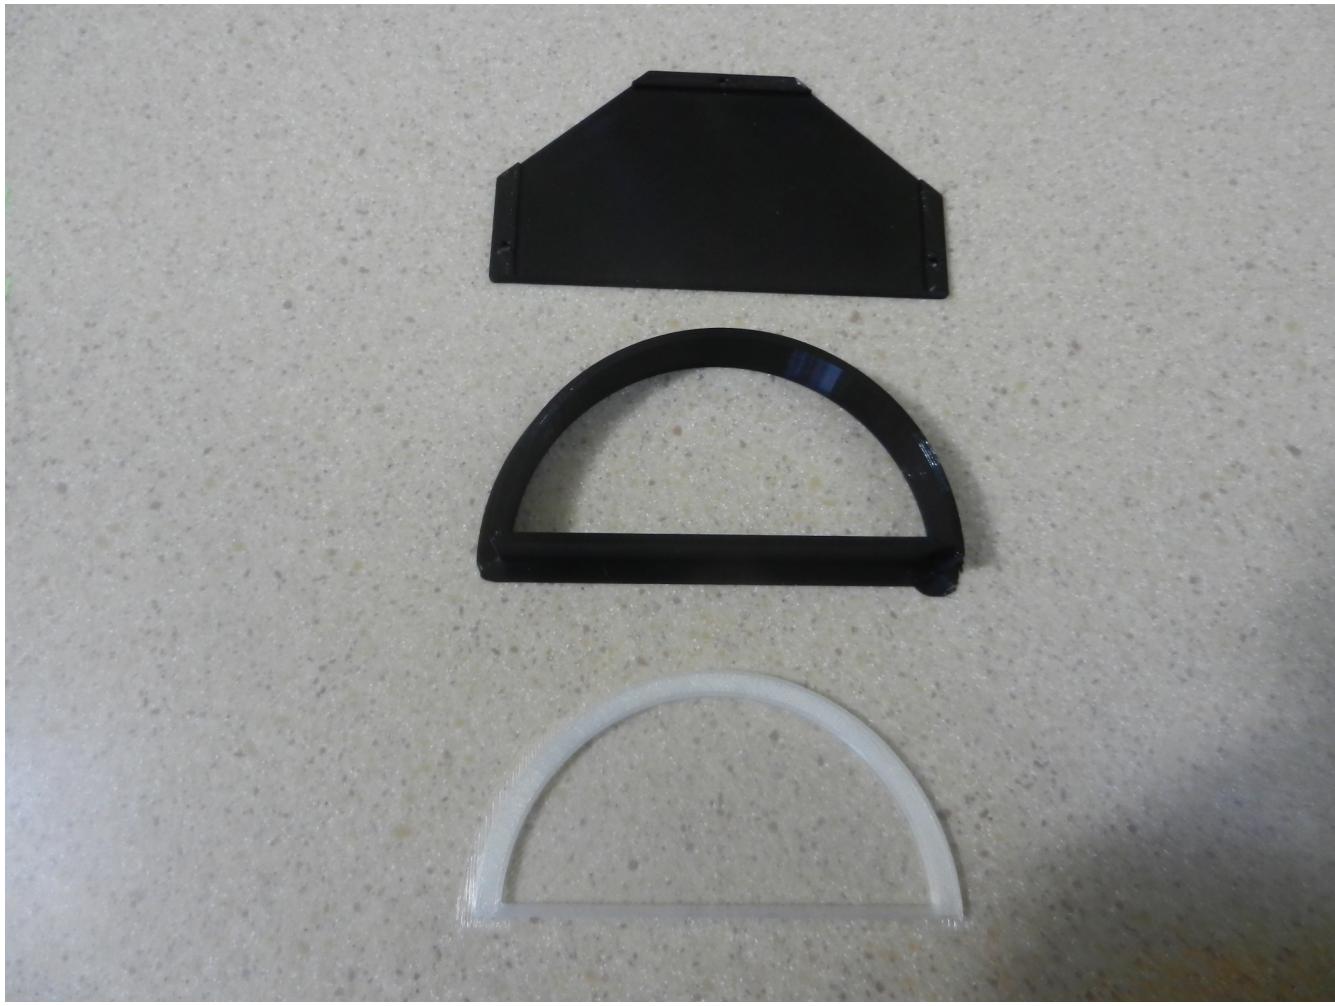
, 3D Printed Mirror Holder, Top Chamber and Top Chamber Window.
